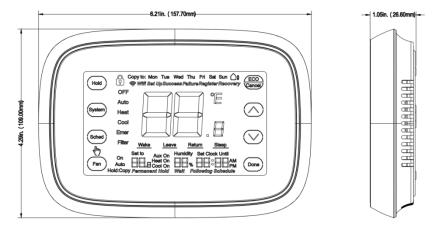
Lakepro-1 front and side dimensions in inches. (mm).
